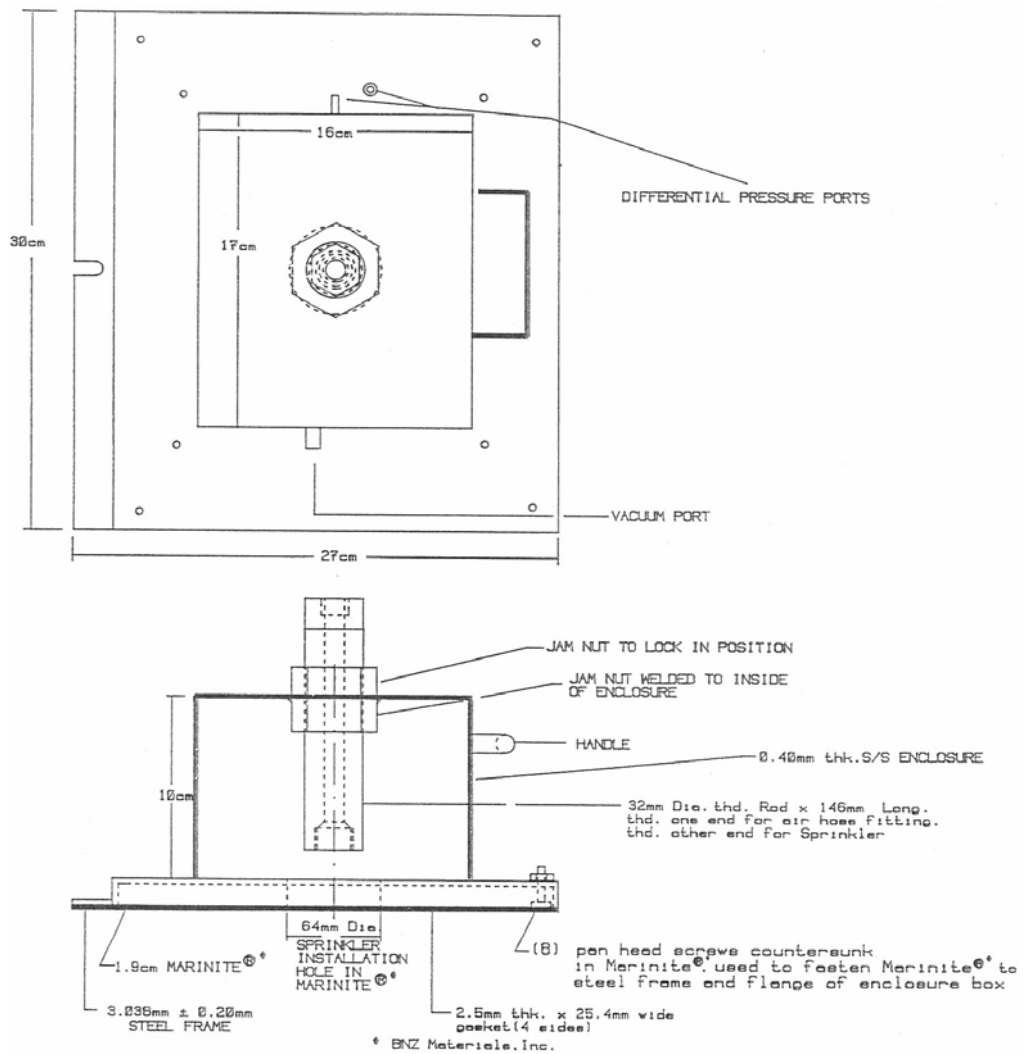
Configuration of the special mounting plate (Bill and Heskestad 1995)
